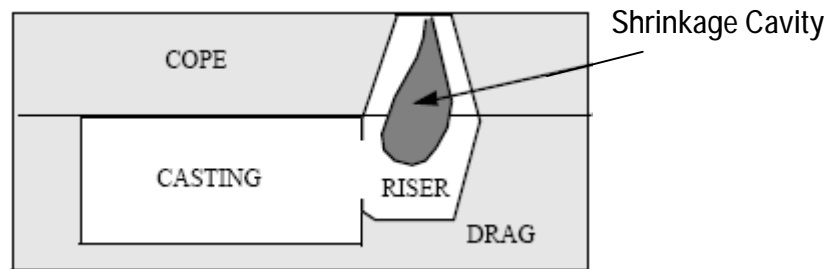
Schematic casting set-up showing shrinkage in a riser [2-4]
